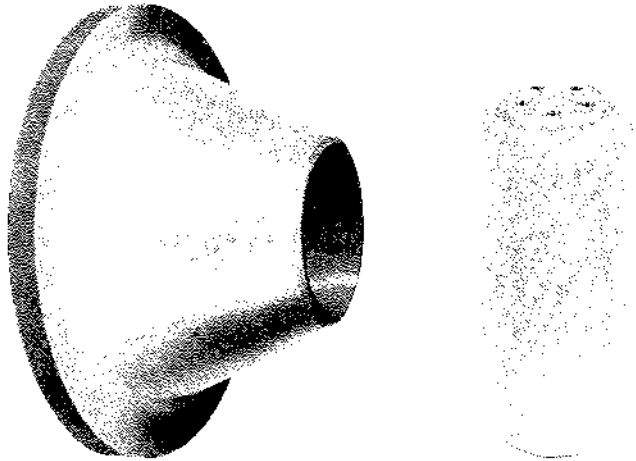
Low-dielectric-constant spacers snap on flexible cable before dies shape the enclosure for welding and corrugating.
